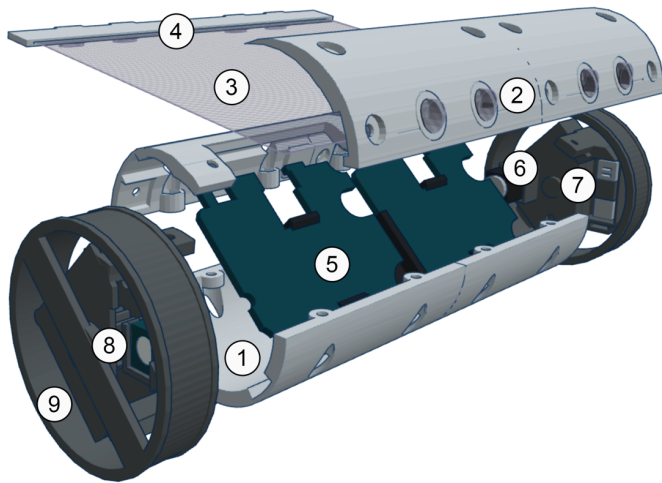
Exploded View of MagicScroll. (1) 3D Printed Body; (2) Magnet Inserts; (3) Flexible OLED Displays; (4) Magnetic Locking Mechanism; (5) Android Boards; (6) Gearmotor and Magnetic Encoder; (7) External Connectors and Power Buttons; (8) 3D printed gear box; (9) Scrollwheel.
